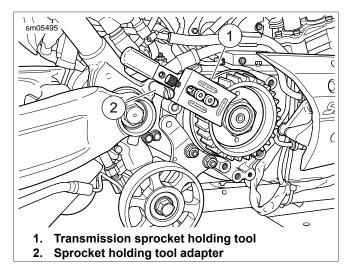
Sprocket Holding Tool and Adapter (installation XR 1200X)
